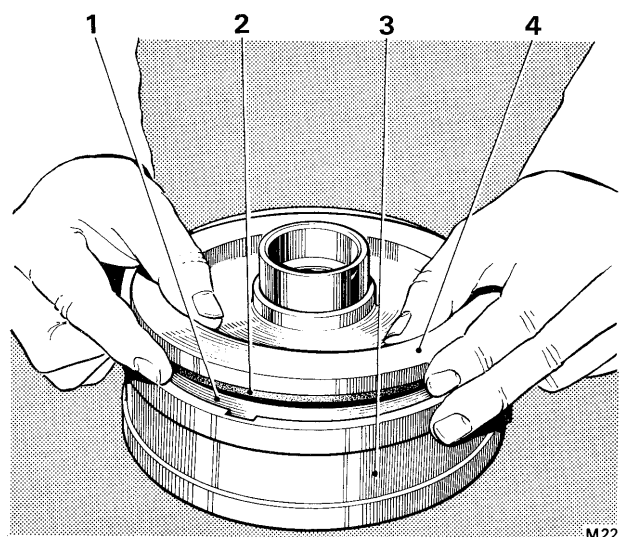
FITTING THE CENTRE CLUTCH PISTON
